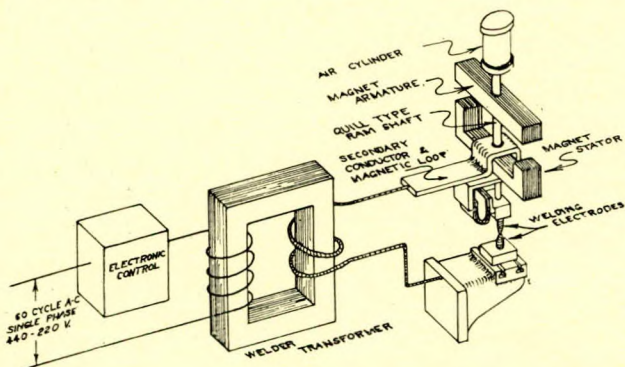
Skeleton schematic of a magnetic force welder
